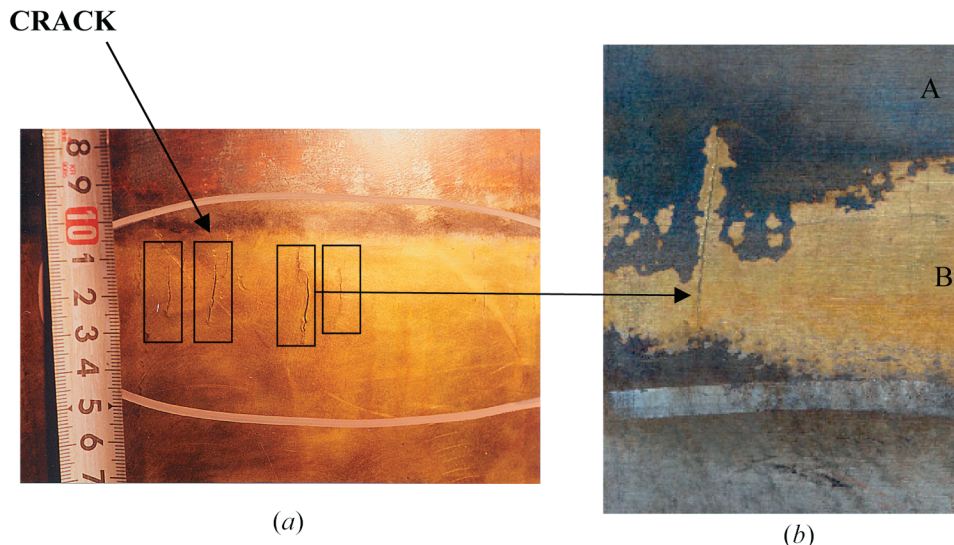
(a) Photograph of the mold crack and (b) magnified view.
